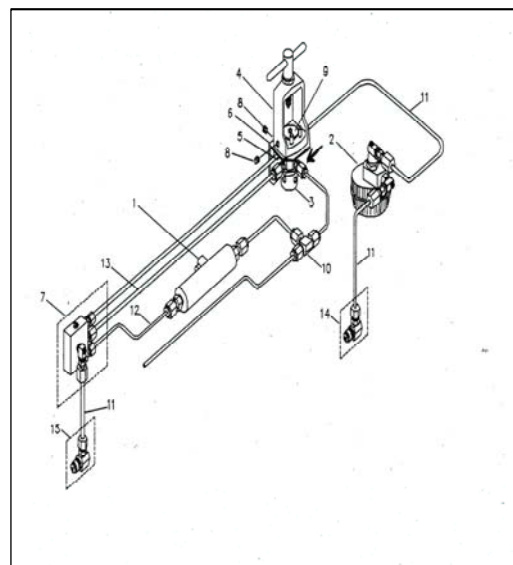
Engineering drawing showing the location (at arrow) of the leak at the T-connection on Apparatus #15
